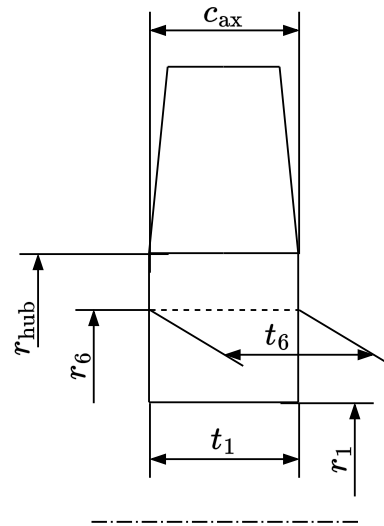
Sketch of a ring disk indicating major dimensions.
